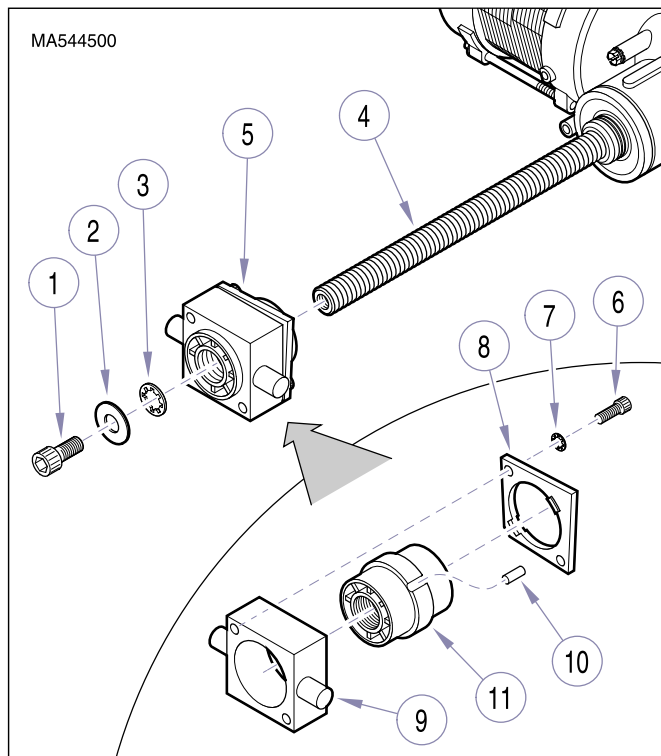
Base Motor Trunnion / Drive Nut Removal / Installation
